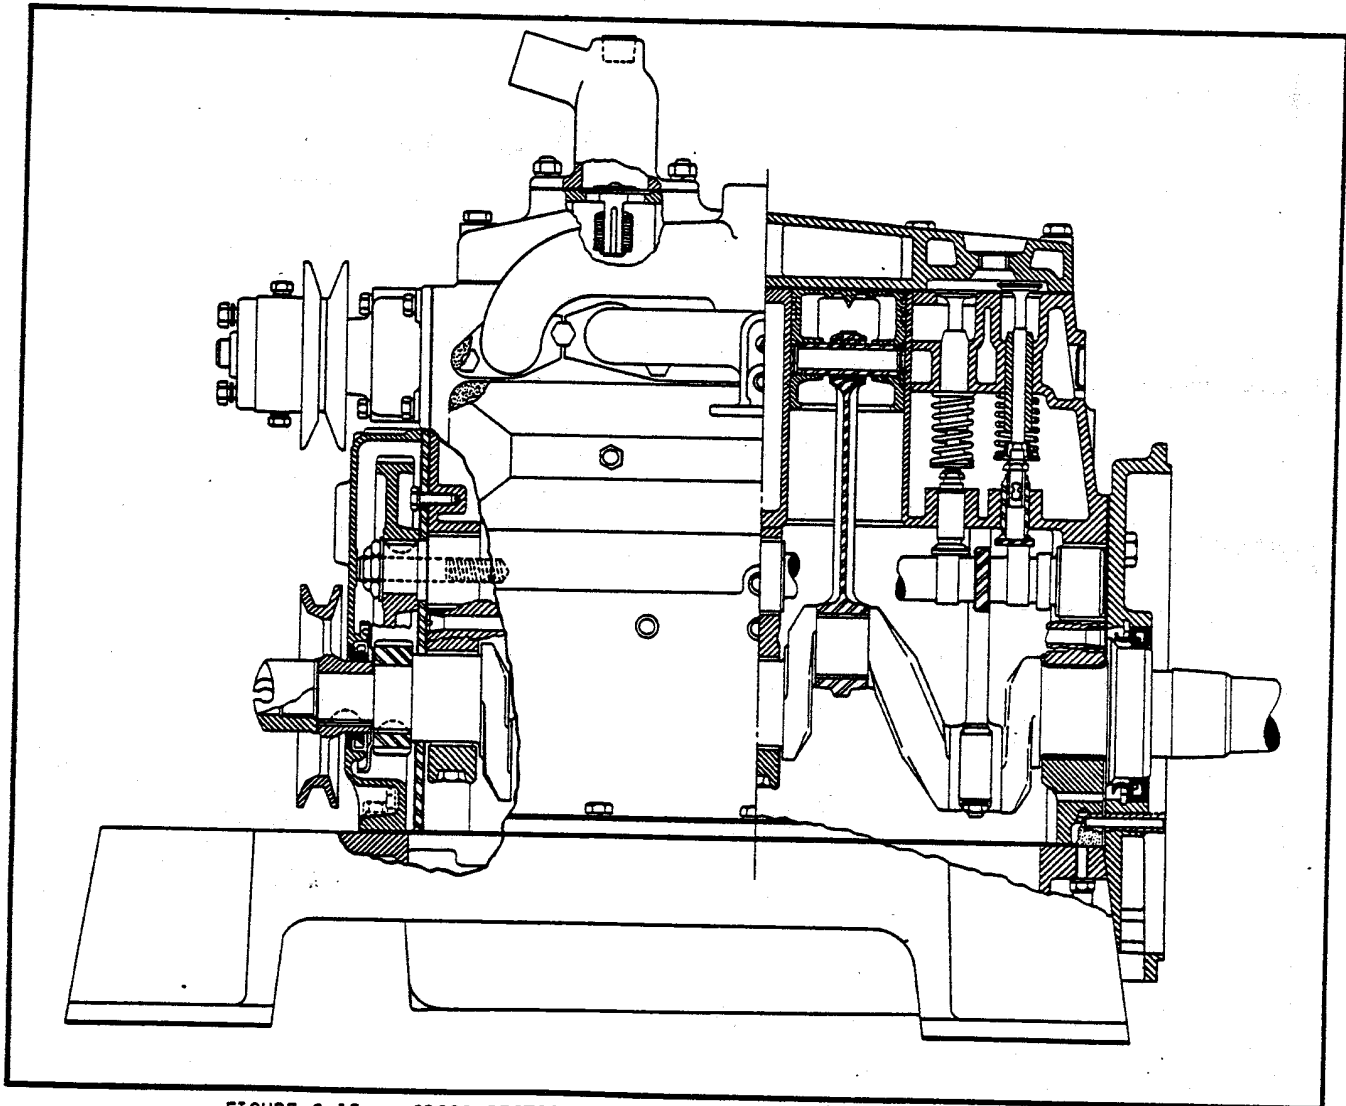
CROSS SECTIONAL VIEW - LEFT SIDE OF ENGINE
